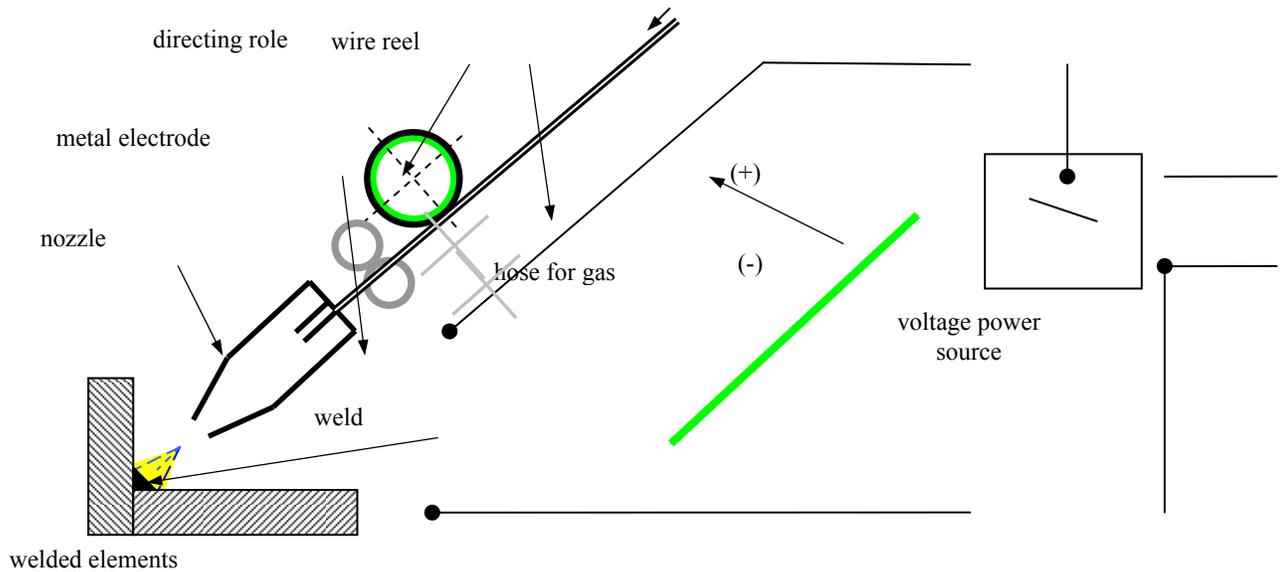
Draft of metal inert gas (MIG) and metal active gas (MAG) welding (Pilarczyk 2003)
